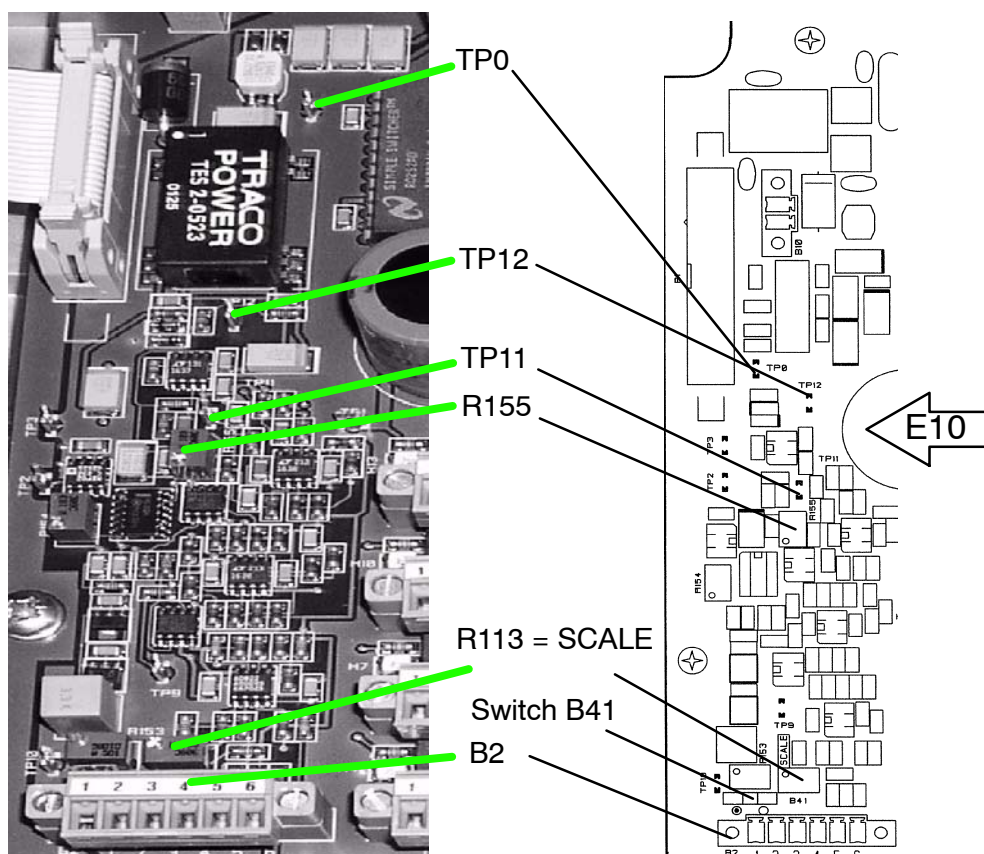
Testpoint at the I/O PCB to adjust the magnetic sonde
